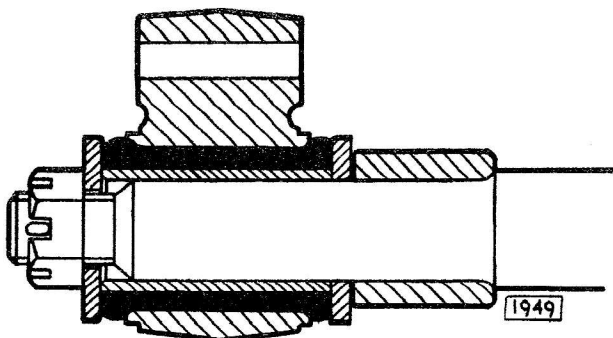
Section through one of the lower wishbone rubber/steel bushed mounting brackets.
